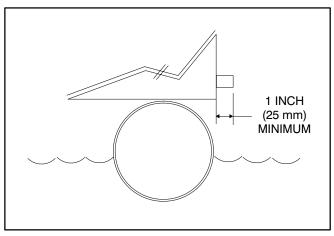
TERMINATING THE EXHAUST TAILPIPE
